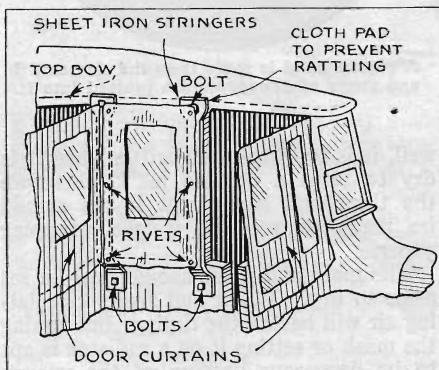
Front edge of second curtain on car can be relieved of strain with metal strip.
